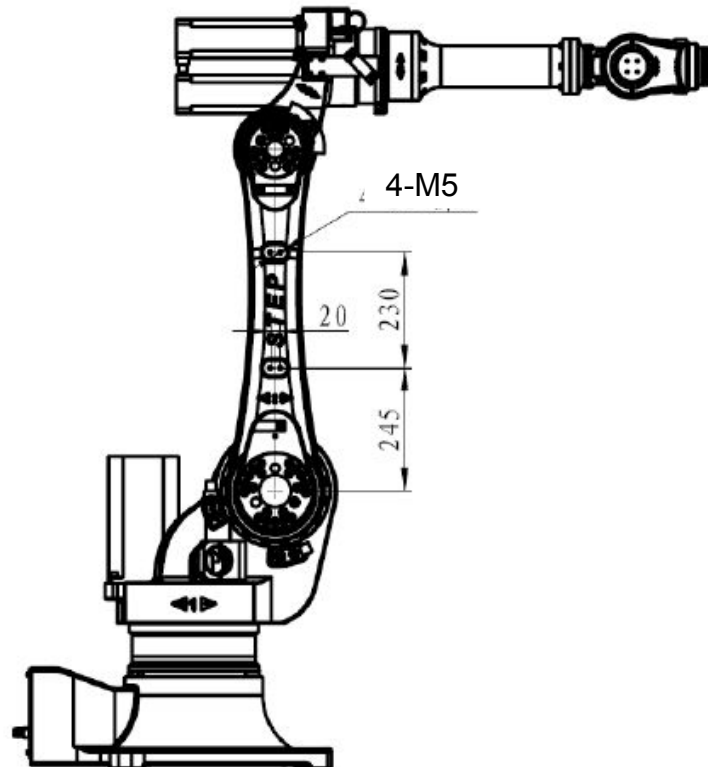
Upper Arm Auxiliary Mounting Hole Dimensions of SR18
